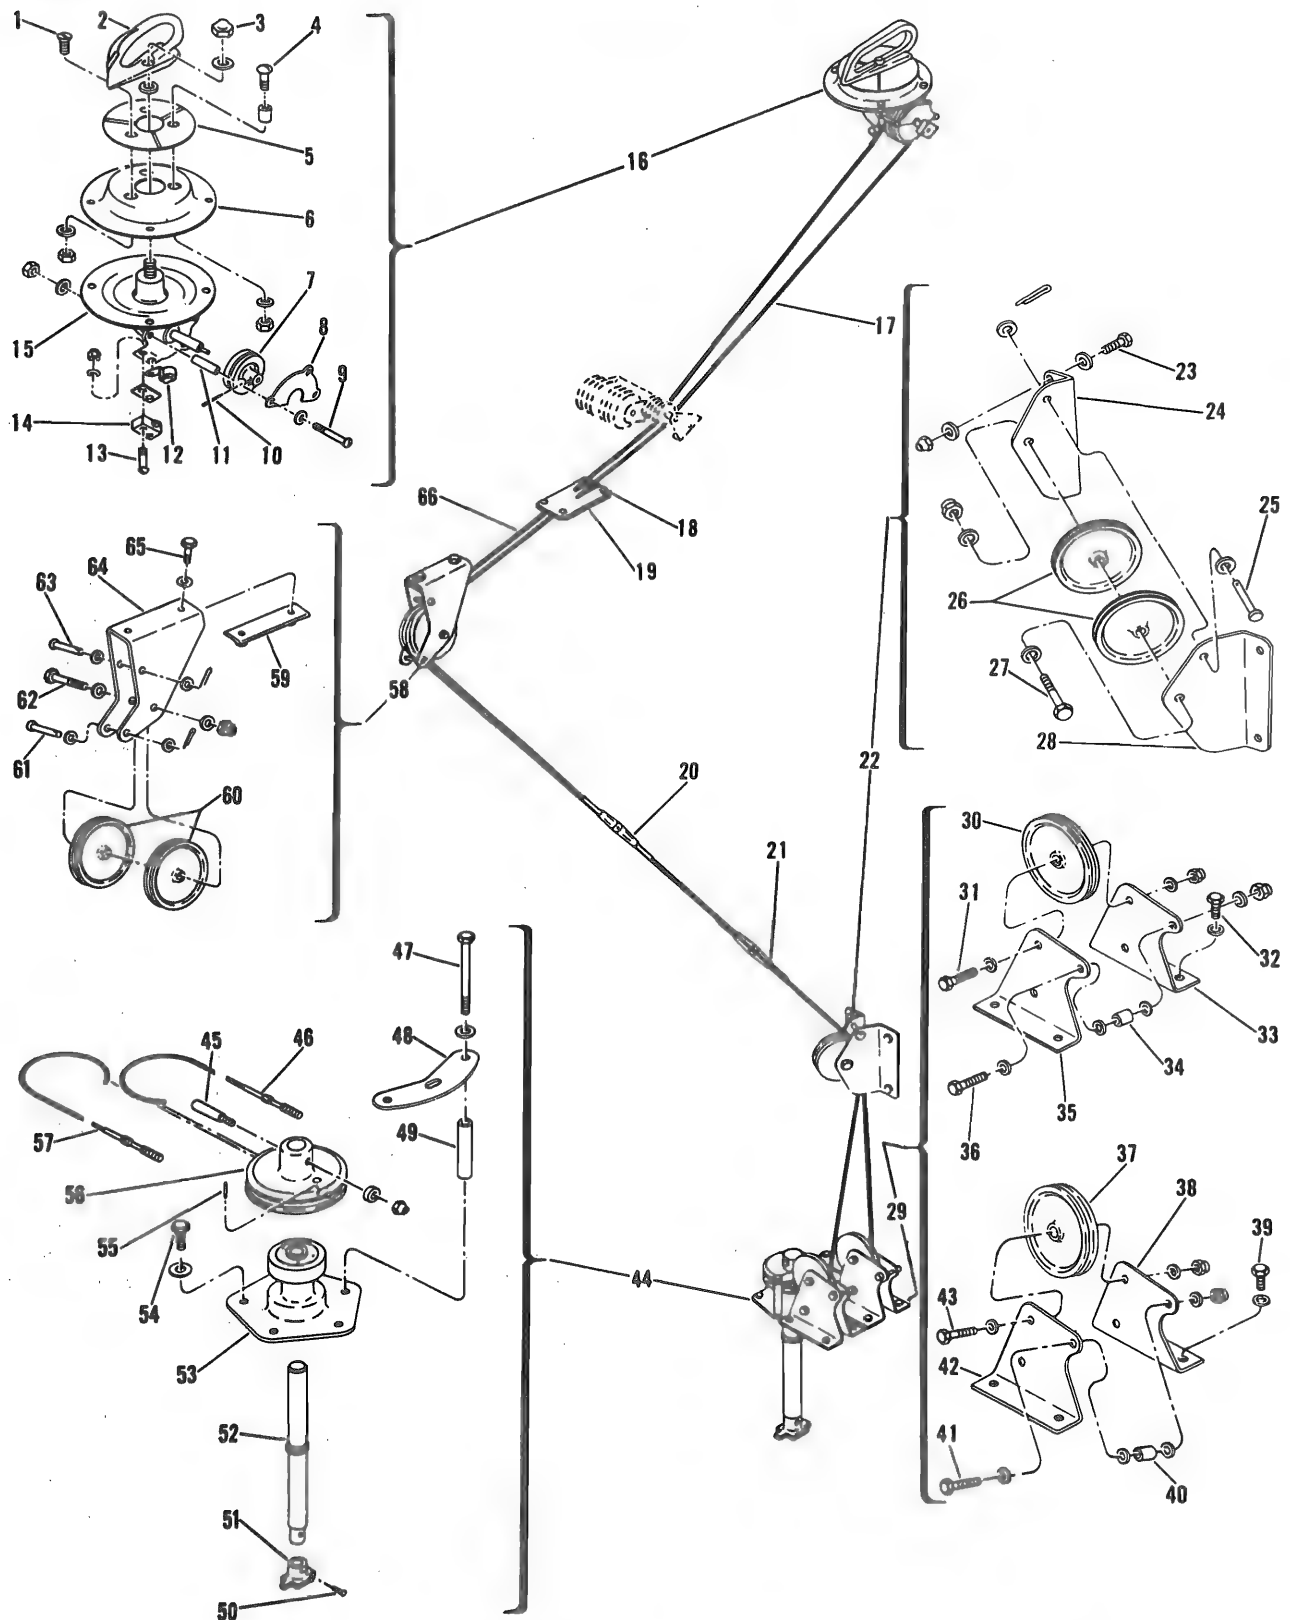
Fuel Control System (Helicopters Serial No. Prior to 56-4313) (Sheet 1 of 2)
